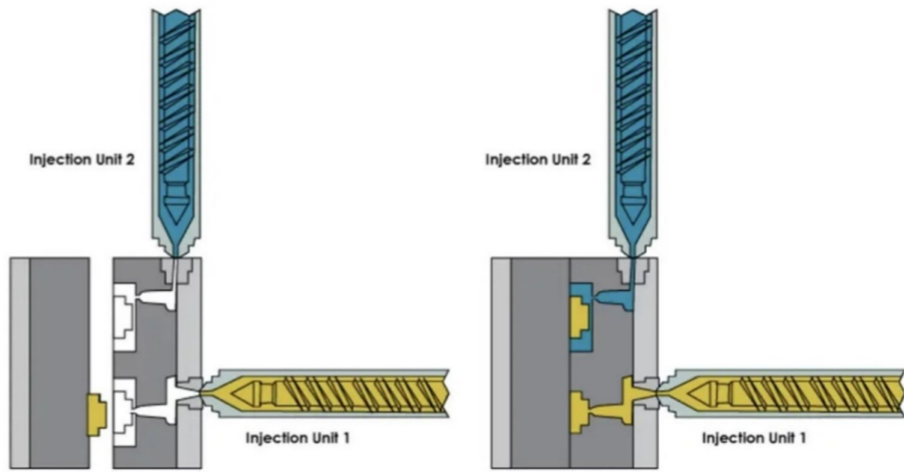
Injection Moulding (www.linkedin.com, n.d.)
